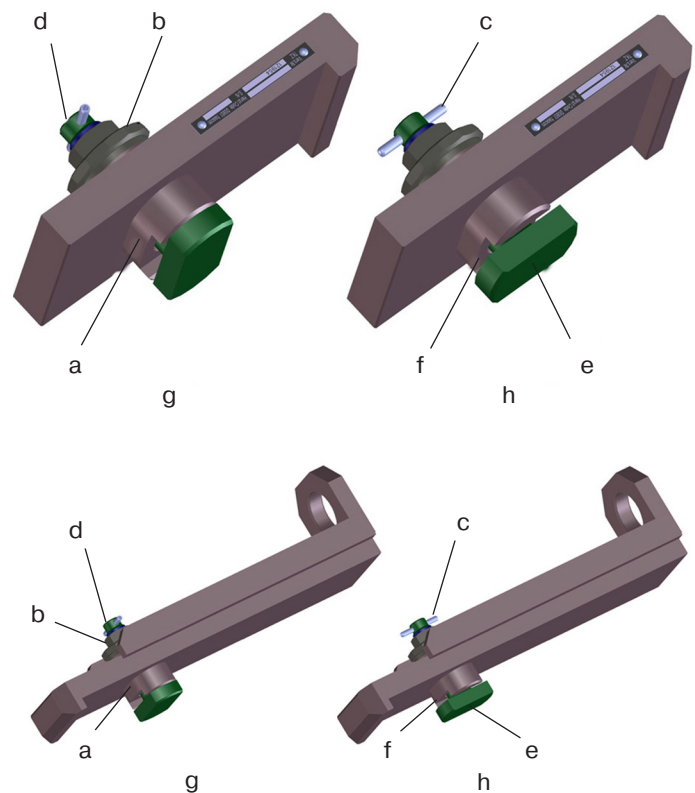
retaining bracket (top) / retaining console (bottom)
